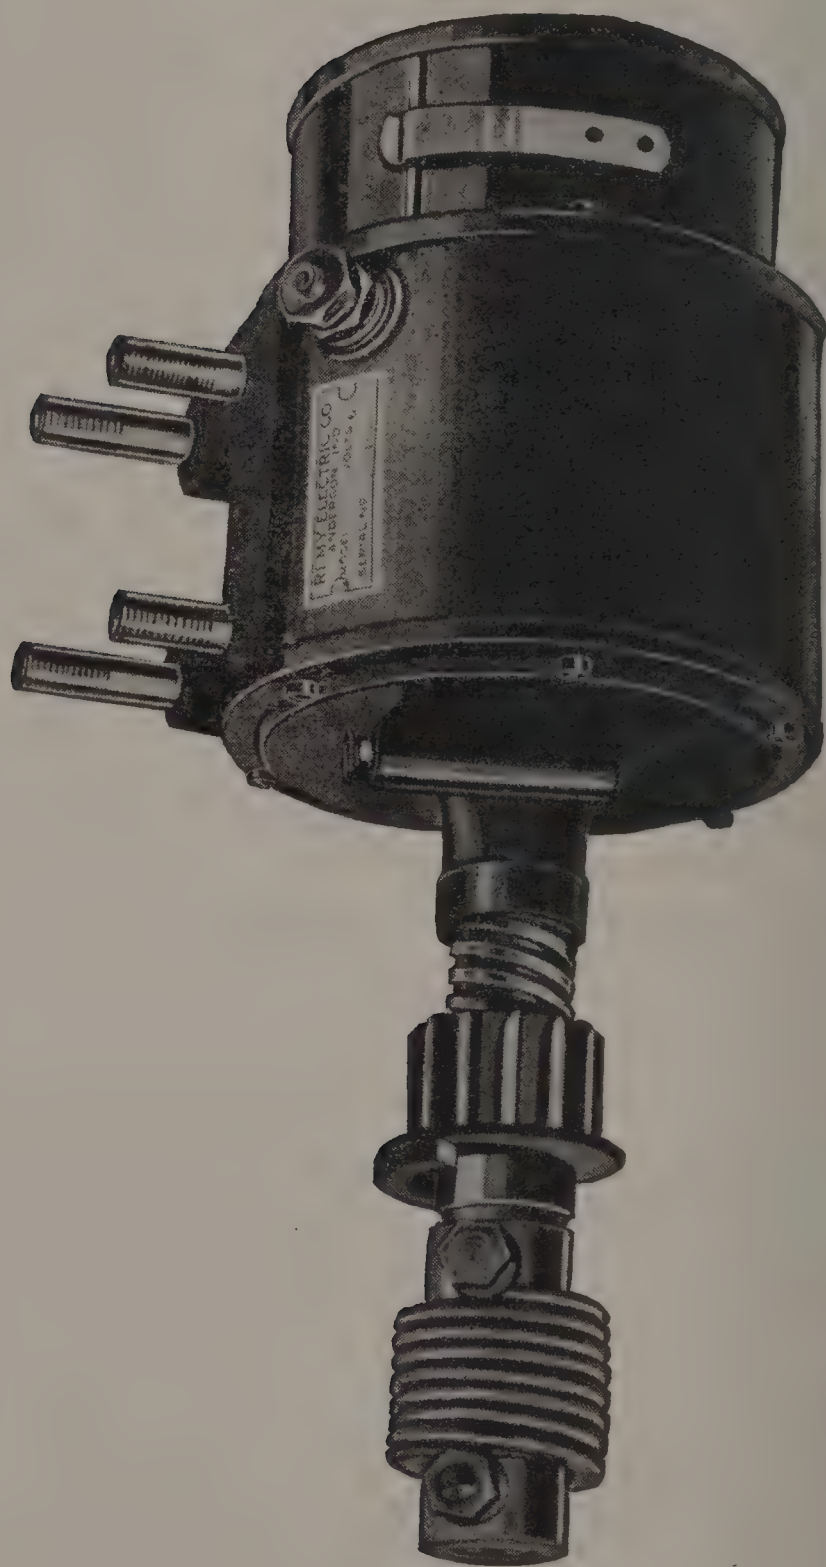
Bendix drive, or automatic pinion shift, showing the relation of the various parts as applied to Remy motor
